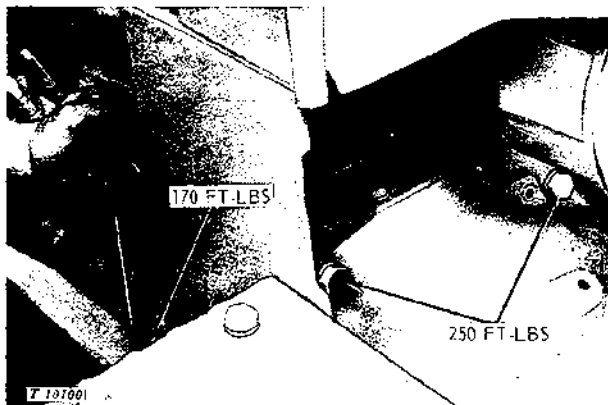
Tightening Engine Attaching Cap Screws
